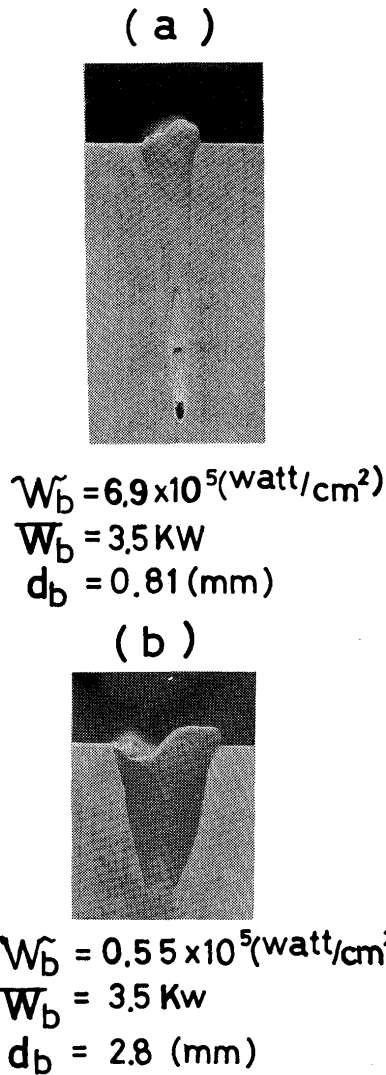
(a) (b) Typical cross-sectional views of weld beads by wide and narrow diameter beams in Fig. 6.
